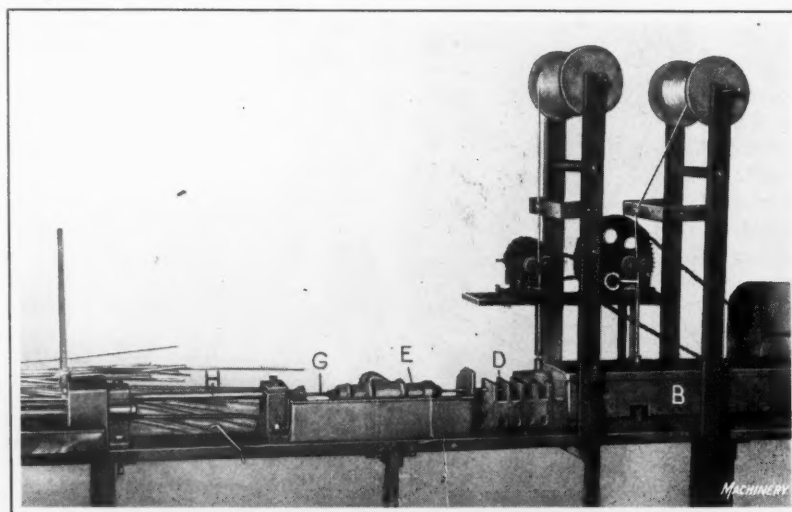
Finishing End of the Tube Rolling Machine where the Tubing is sized, cooled, and cut off
